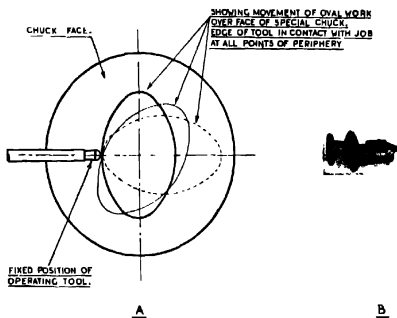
Showing oval work, and special tailstock follower attachment.
